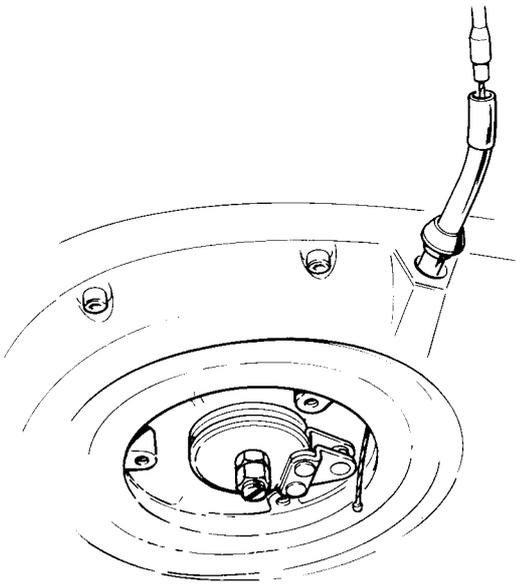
Clutch Cable Removal at the Primary Chaincase
